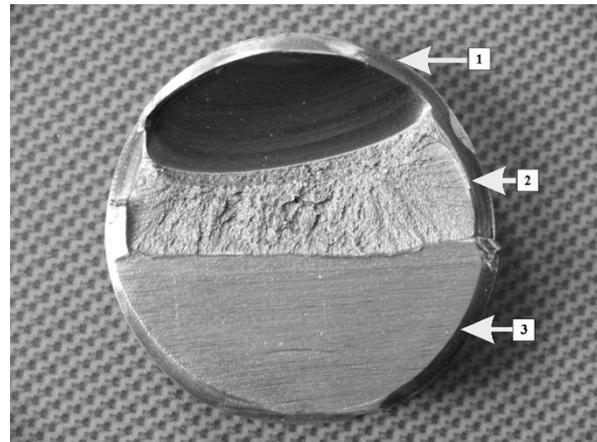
Fracture of the suspension rod: 1 – fatigue zone, 2 – transition zone formed in the bending test, 3 – area formed after undercutting with a band saw
